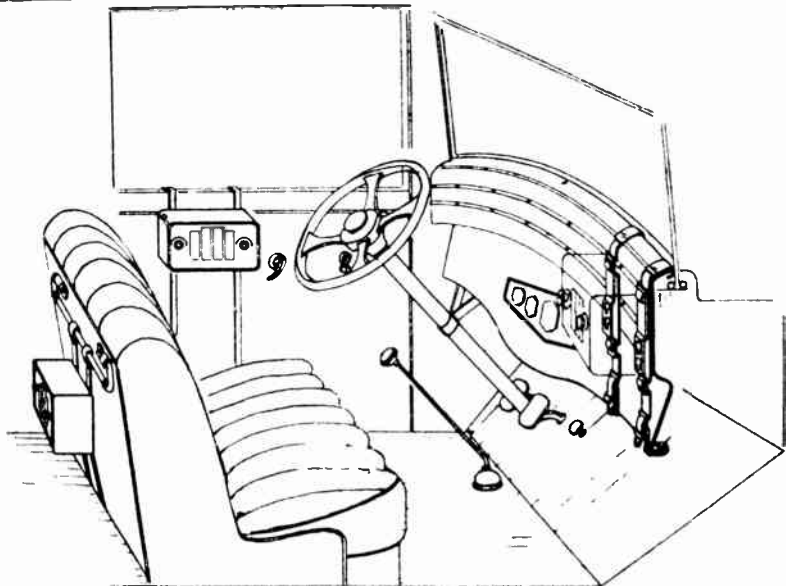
SKETCH SHOWING VARIOUS MOUNTING OF RECEIVER
